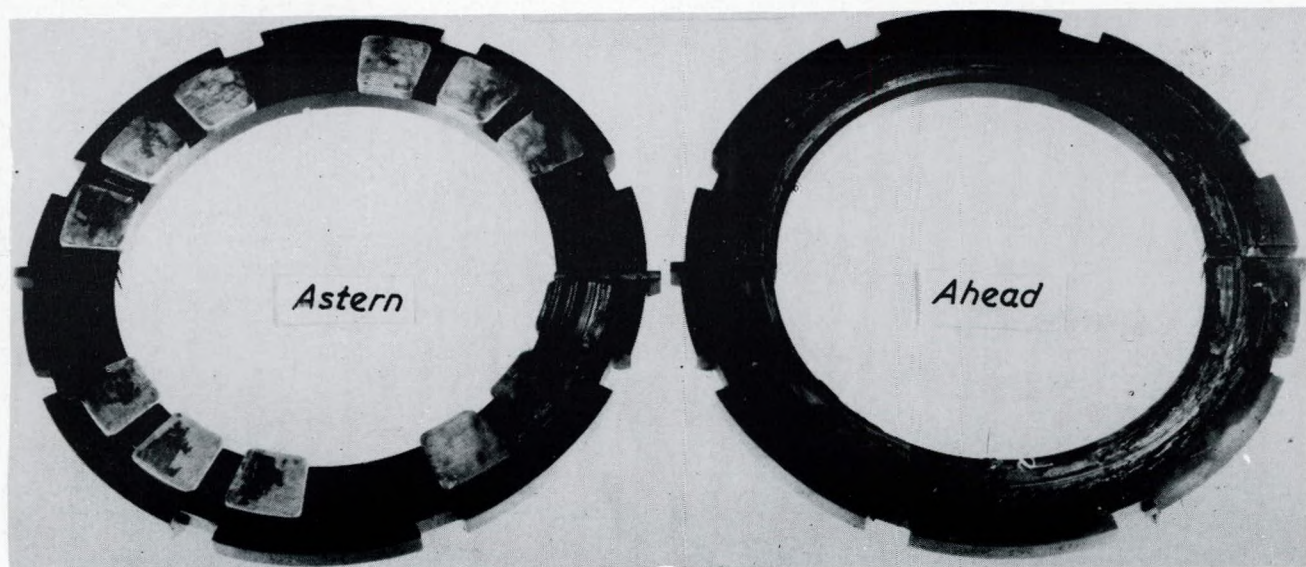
Kootenay pinion thrust bearing pad assemblies
